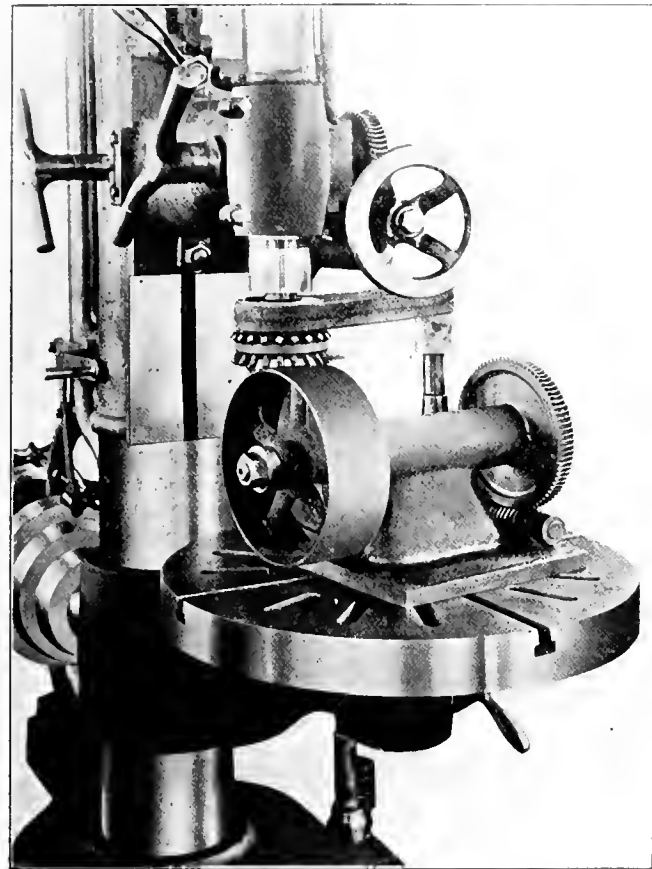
Milling Crowned Pulley Faces on a Drill Press.
